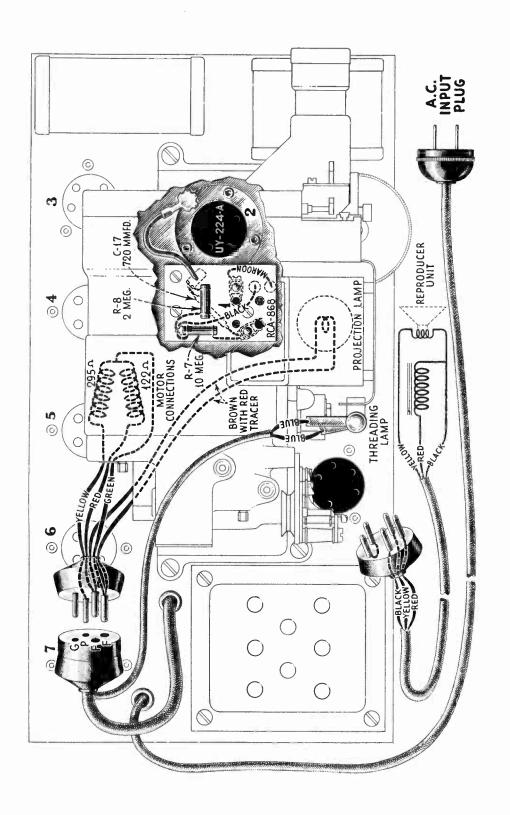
ASSEMBLY WIRING DIAGRAM.
